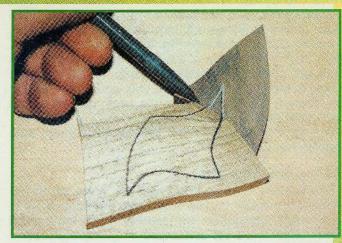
A small piece is easily handled when glued to a larger adjoining piece before cutting it out.
